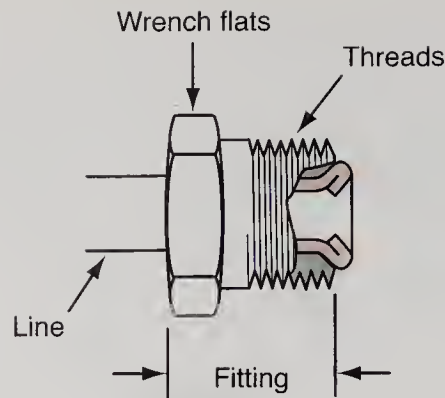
Typical flare-nut fitting for an inverted flare connection.
